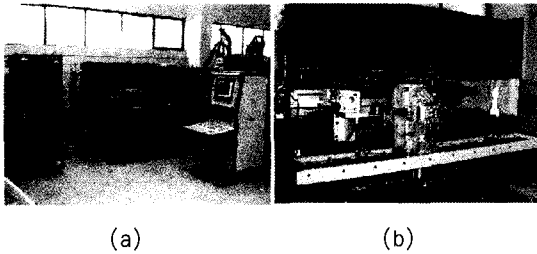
(a)Stencil manufacturing system and (b)Beam delivery equipment
